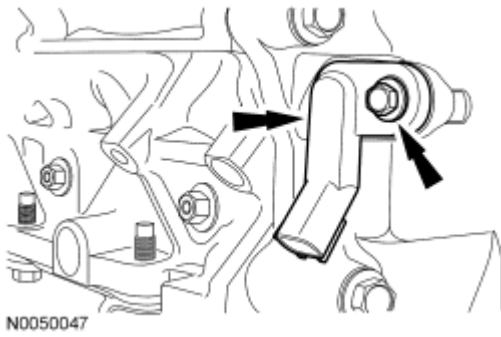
Locating Crankshaft Position (CKP) Sensor Bolt
